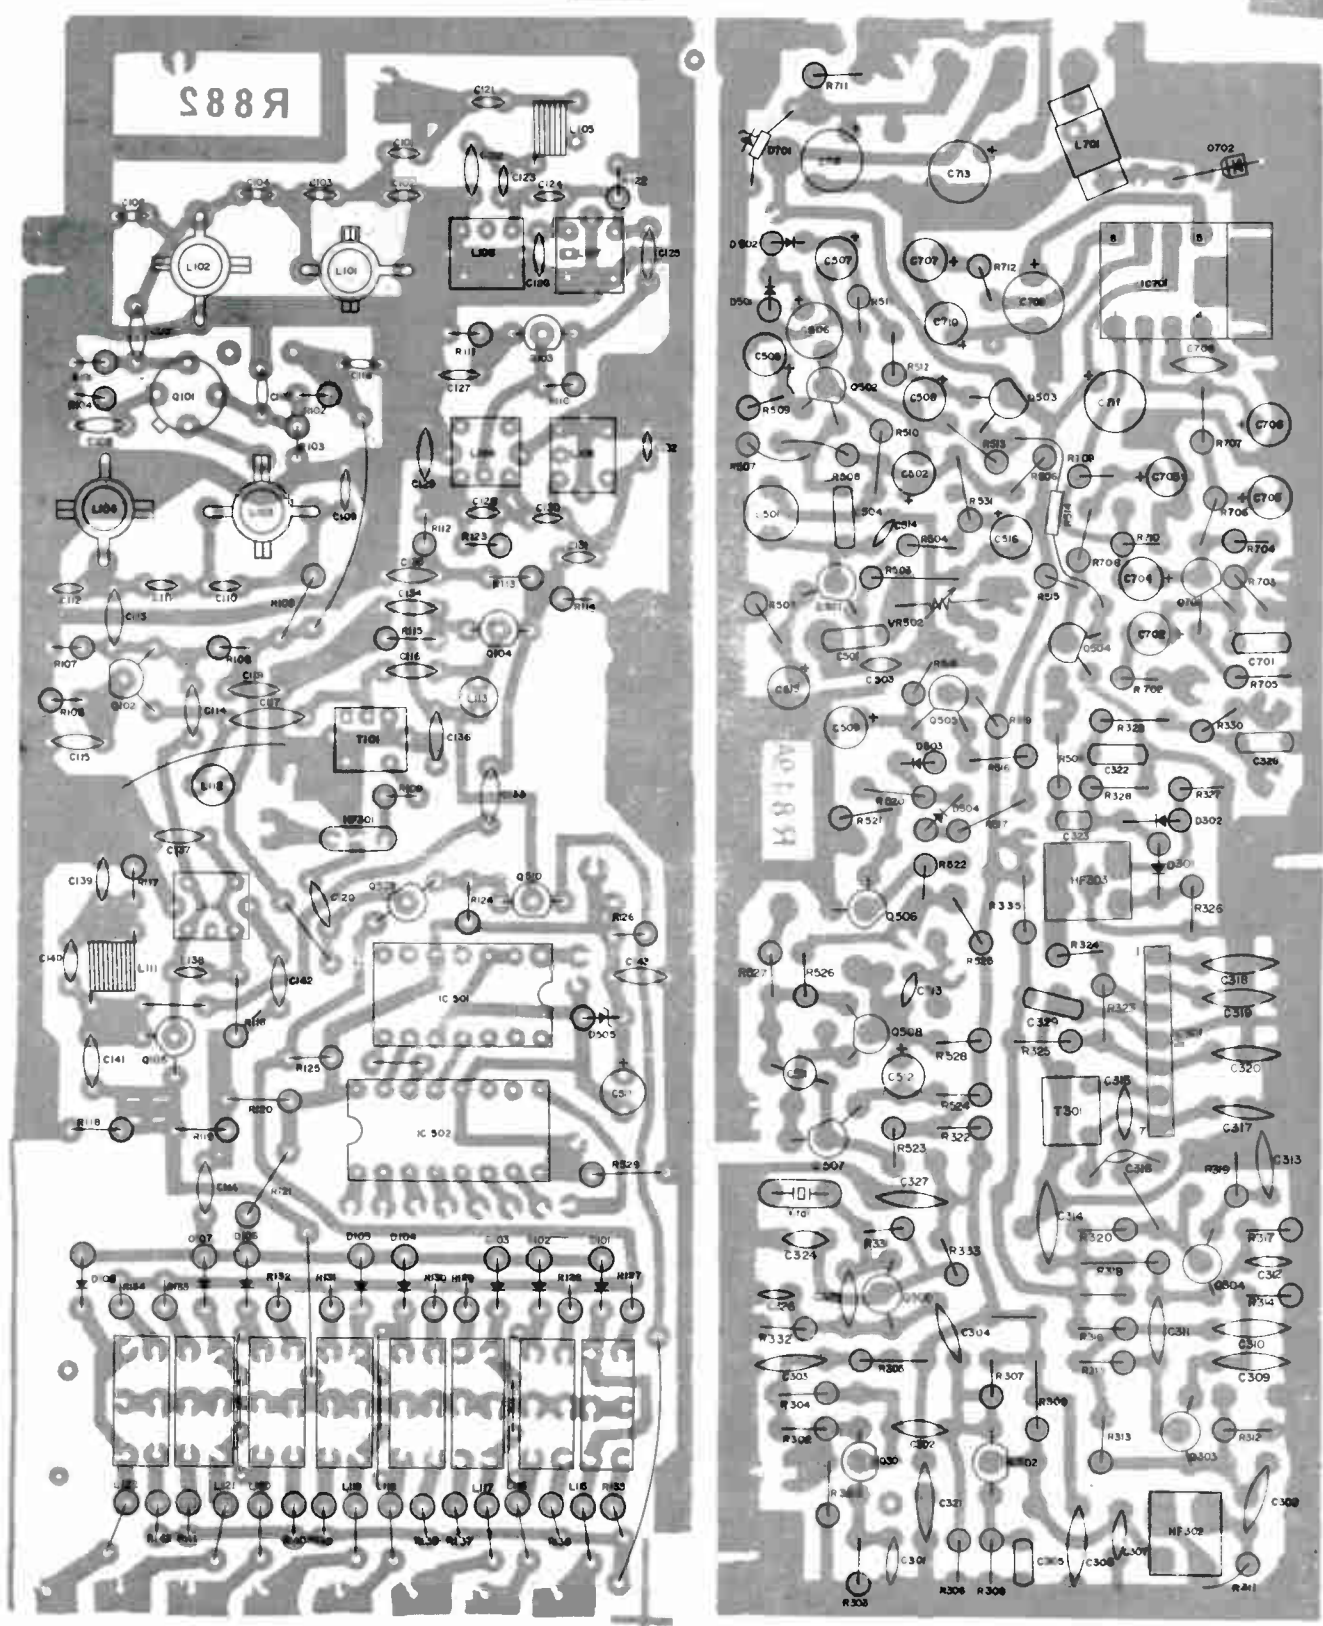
, MODEL M8-HL, P.C. BOARD, COMPONENT SIDE
